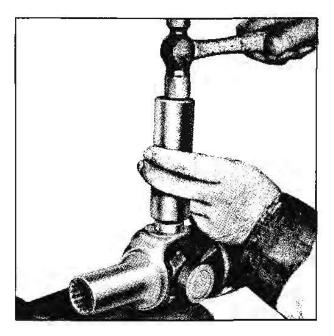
A-4 Removing Bearing From Splined Yoke Member
